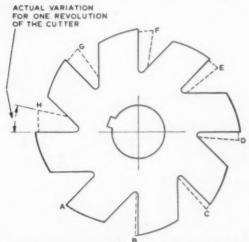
The degree of compensation necessary when a spiral cutter is machined
